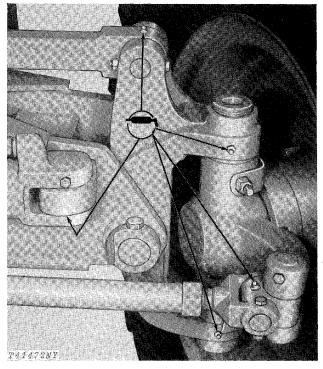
Front Axle Grease Fittings (Right Side Shown)
